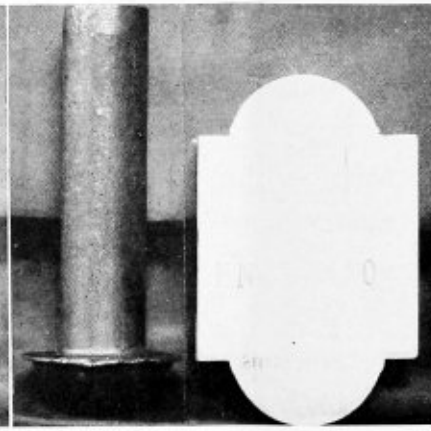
Rivet and section after driving on hydraulic bull riveter
